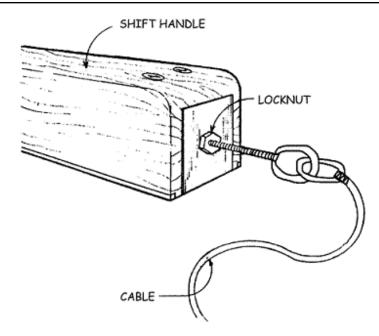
Shift-Handle-to-Drop-Box Cable Attachment
